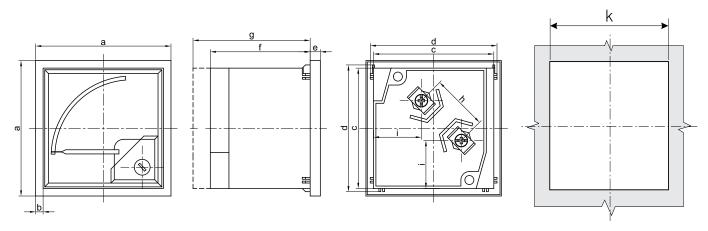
External dimensions of CA36, CA37, CA39, CA32 meters.
